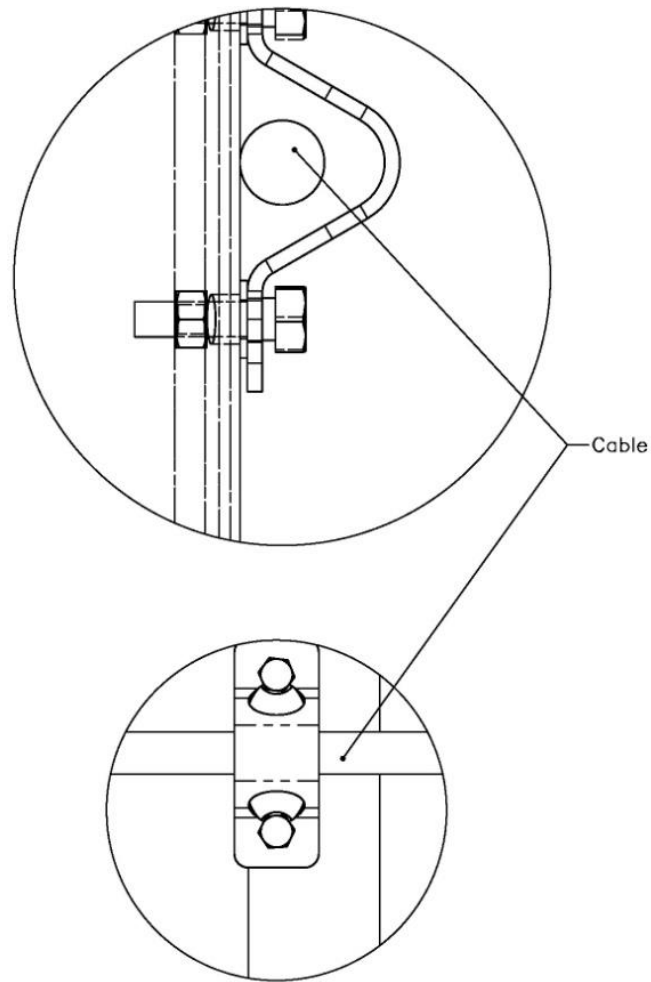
Curved Keyway Bracket with Shoulder Bolts
